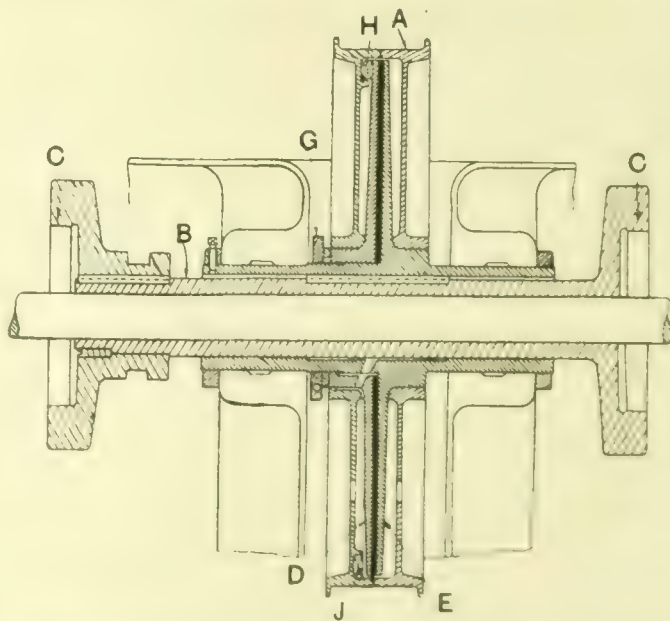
DRIVING AND REVERSING MECHANISM FOR PLANING MACHINES.
